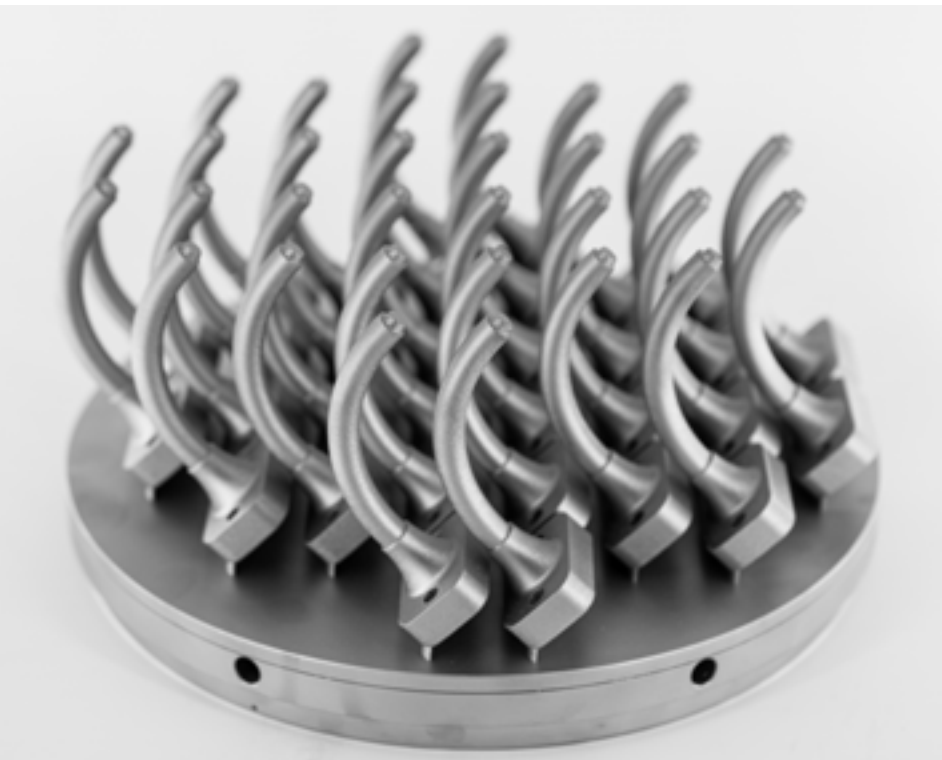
Tooling inserts made of 1.2709 for plastics injection moulding of tracheal tubes on TruPrint 3000. Source: Roehling Direct Manufacturing GmbH, Germany.
